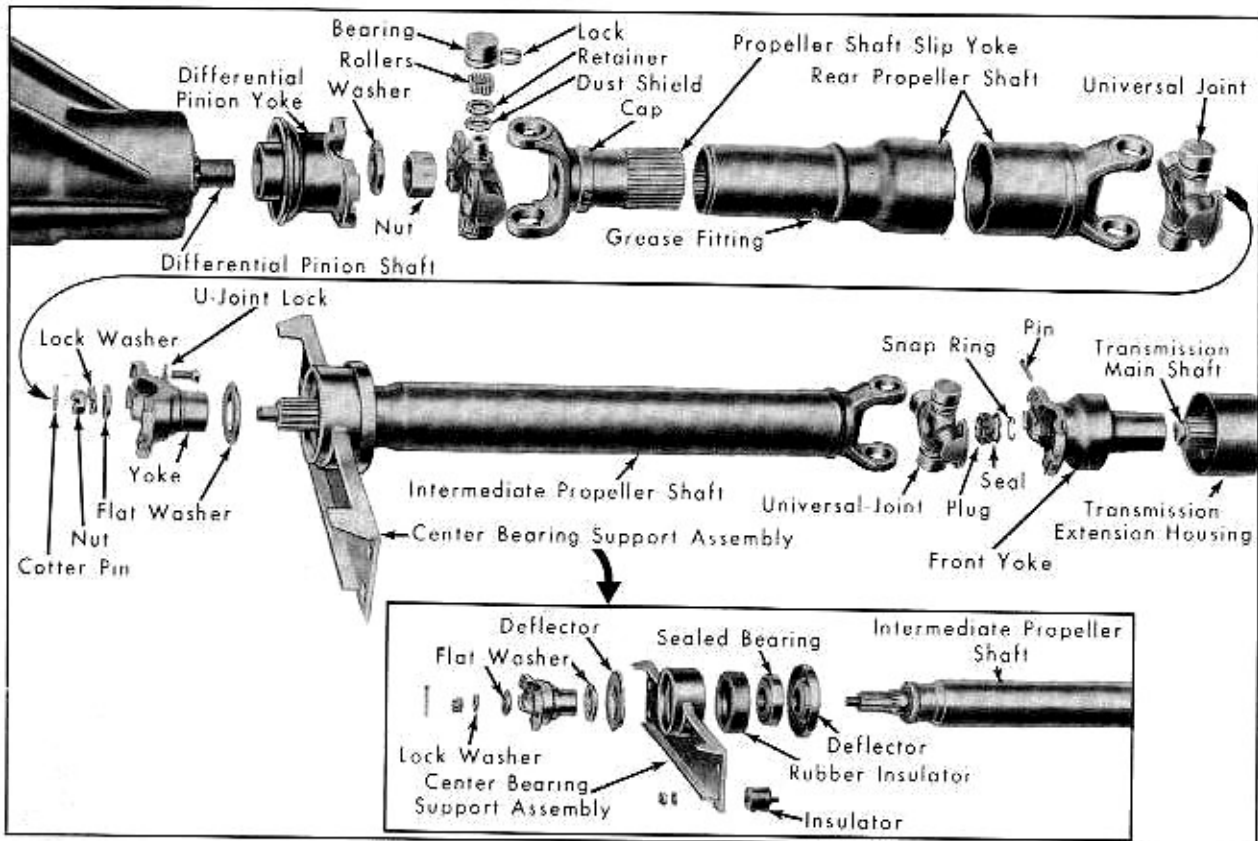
Series 75 and 86 Propeller Shafts - Disassembled
